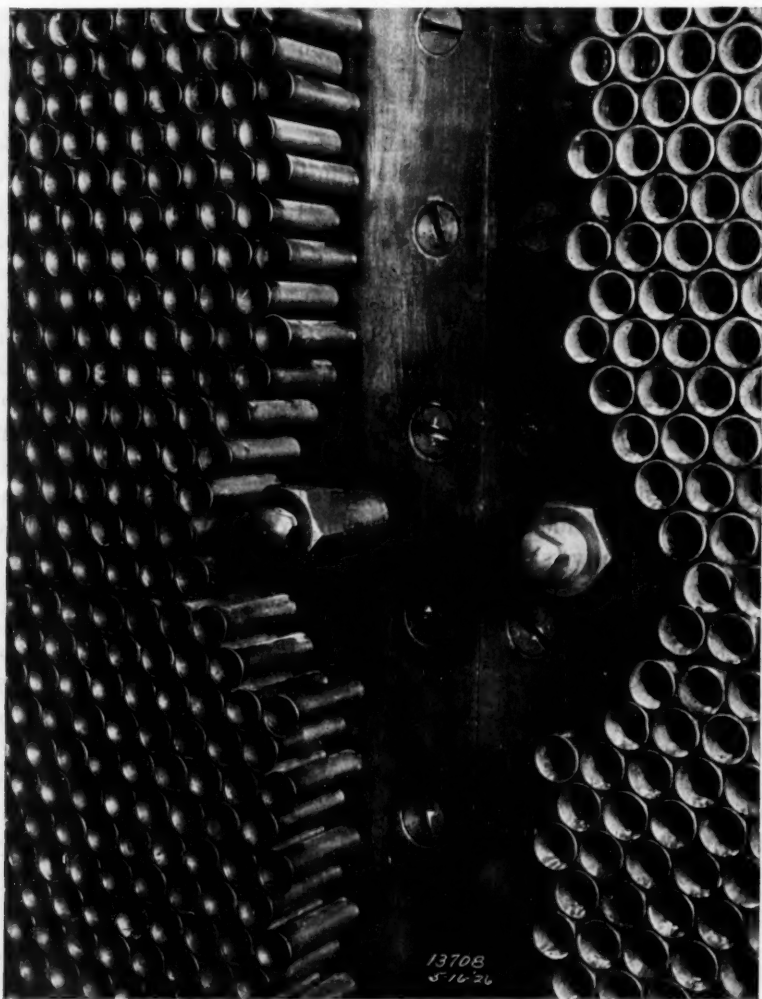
INLET END OF TUBES No. 9 CONDENSER
